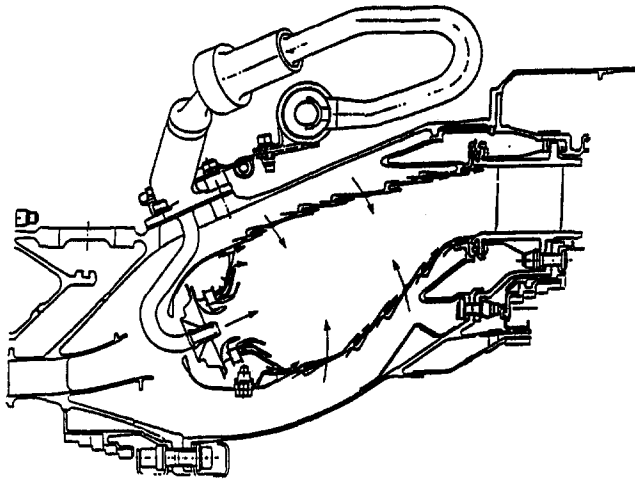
Geometry of a GE/SNECMA CFM56 single annular turbofan engine combustor
